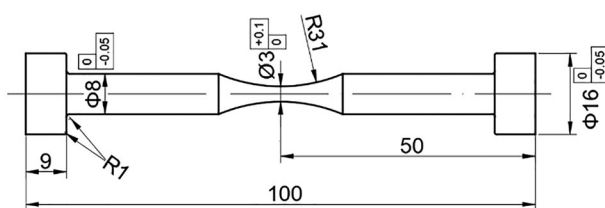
Shape and dimensions (mm) of EA specimen.¹⁹
